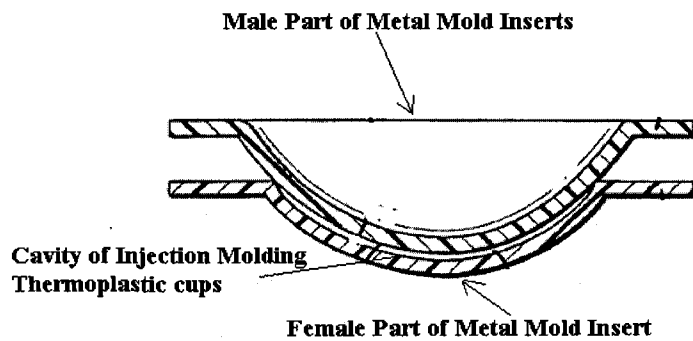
Metal Mold inserts pair for casting thermoplastic cups [4]
